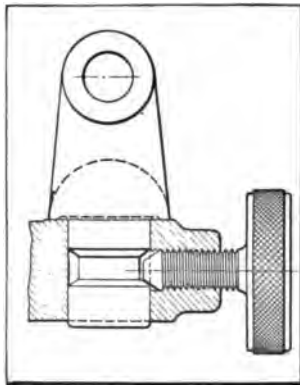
Clamping Screw with Pull-down Action for Clamping Bearing
